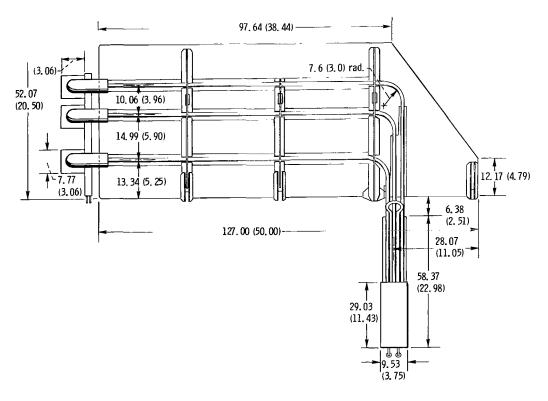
Major dimensions of VCHPS. (All dimensions are in cm (in.).
